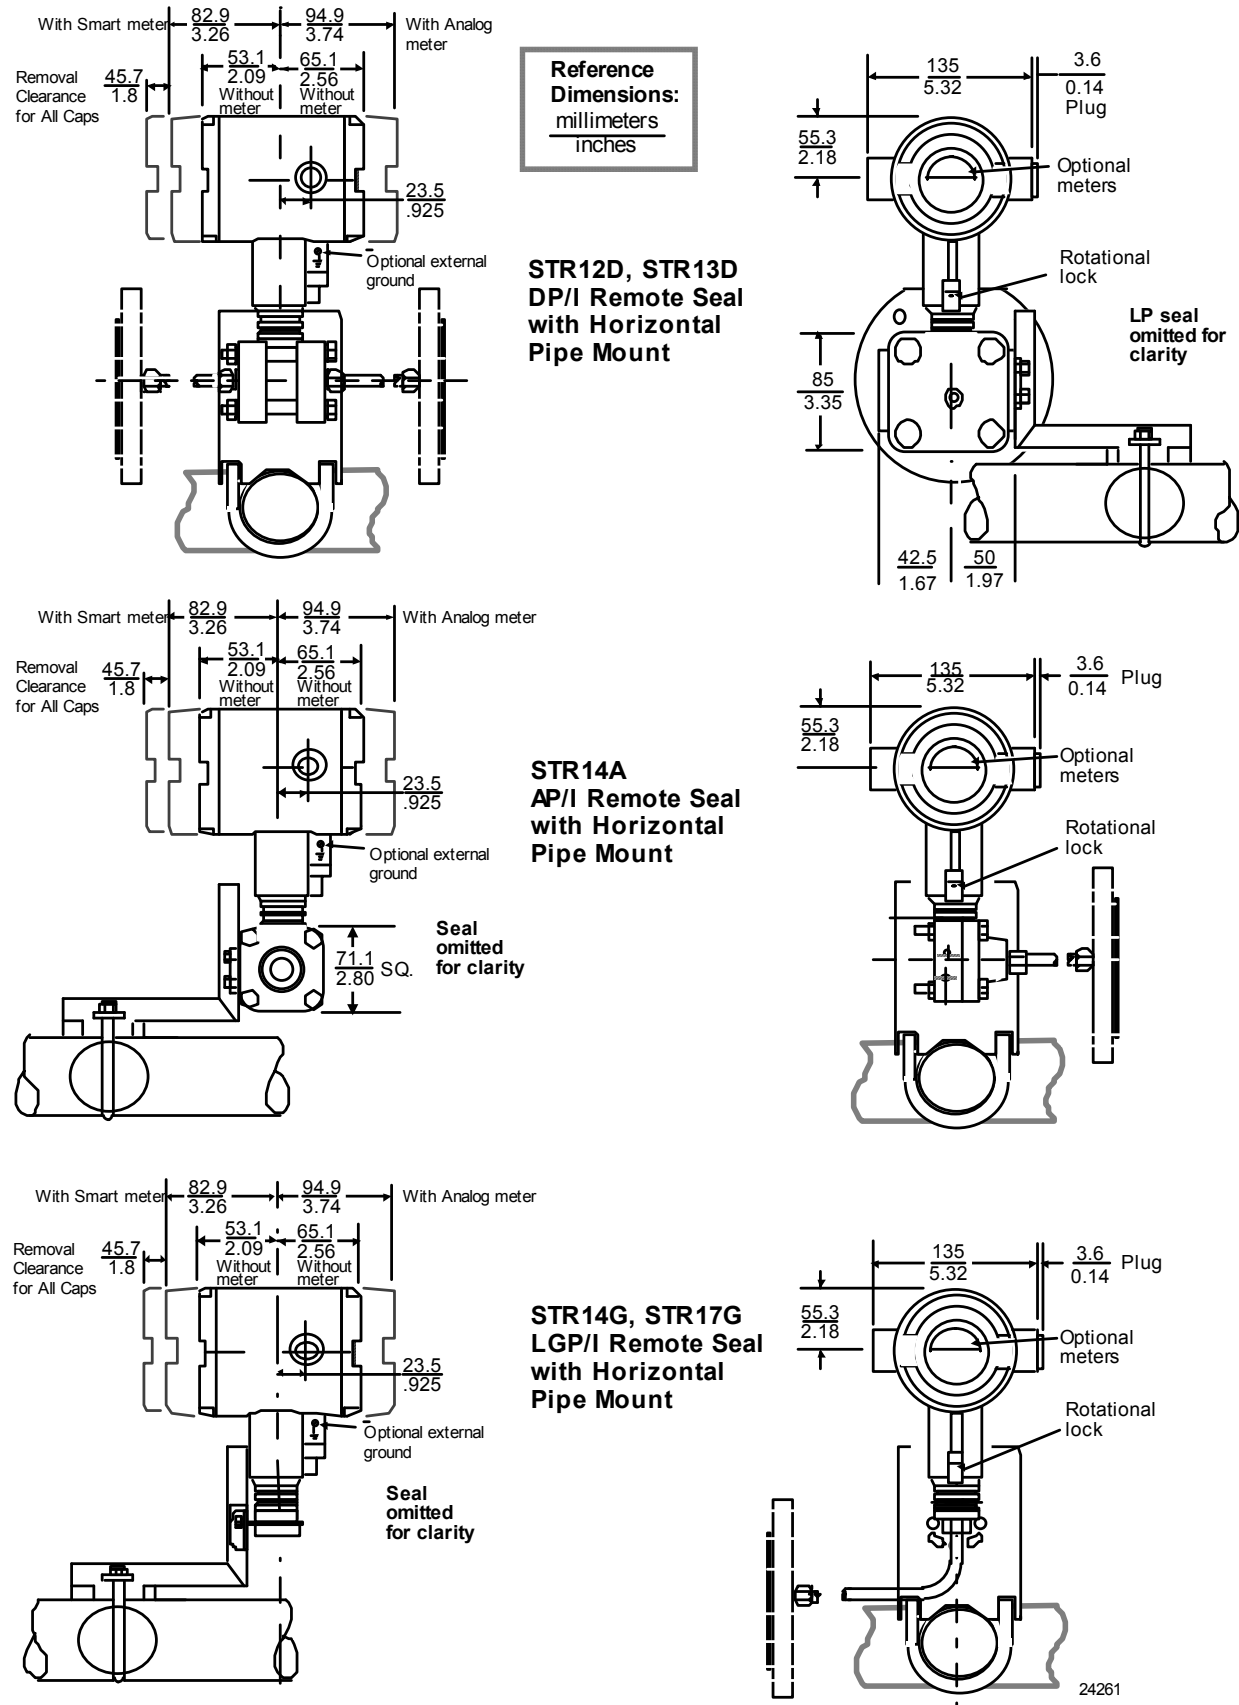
Approximate horizontal mounting dimensions for Remote Seal Transmitter
